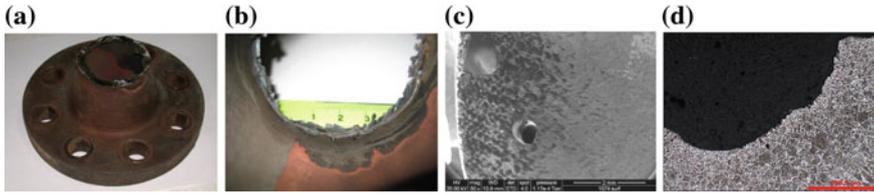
a Failed flange. b Inner surface (eroded) of the flange with small holes in the region of welds. c Morphology of inner surface of the flange with the hole. d Metallographic cross-section through failed region: the pit with smooth walls without corrosion products
